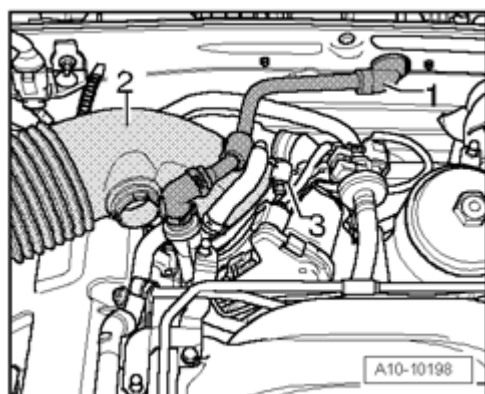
Identifying Vacuum Hose, Intake Hose & Clamp
